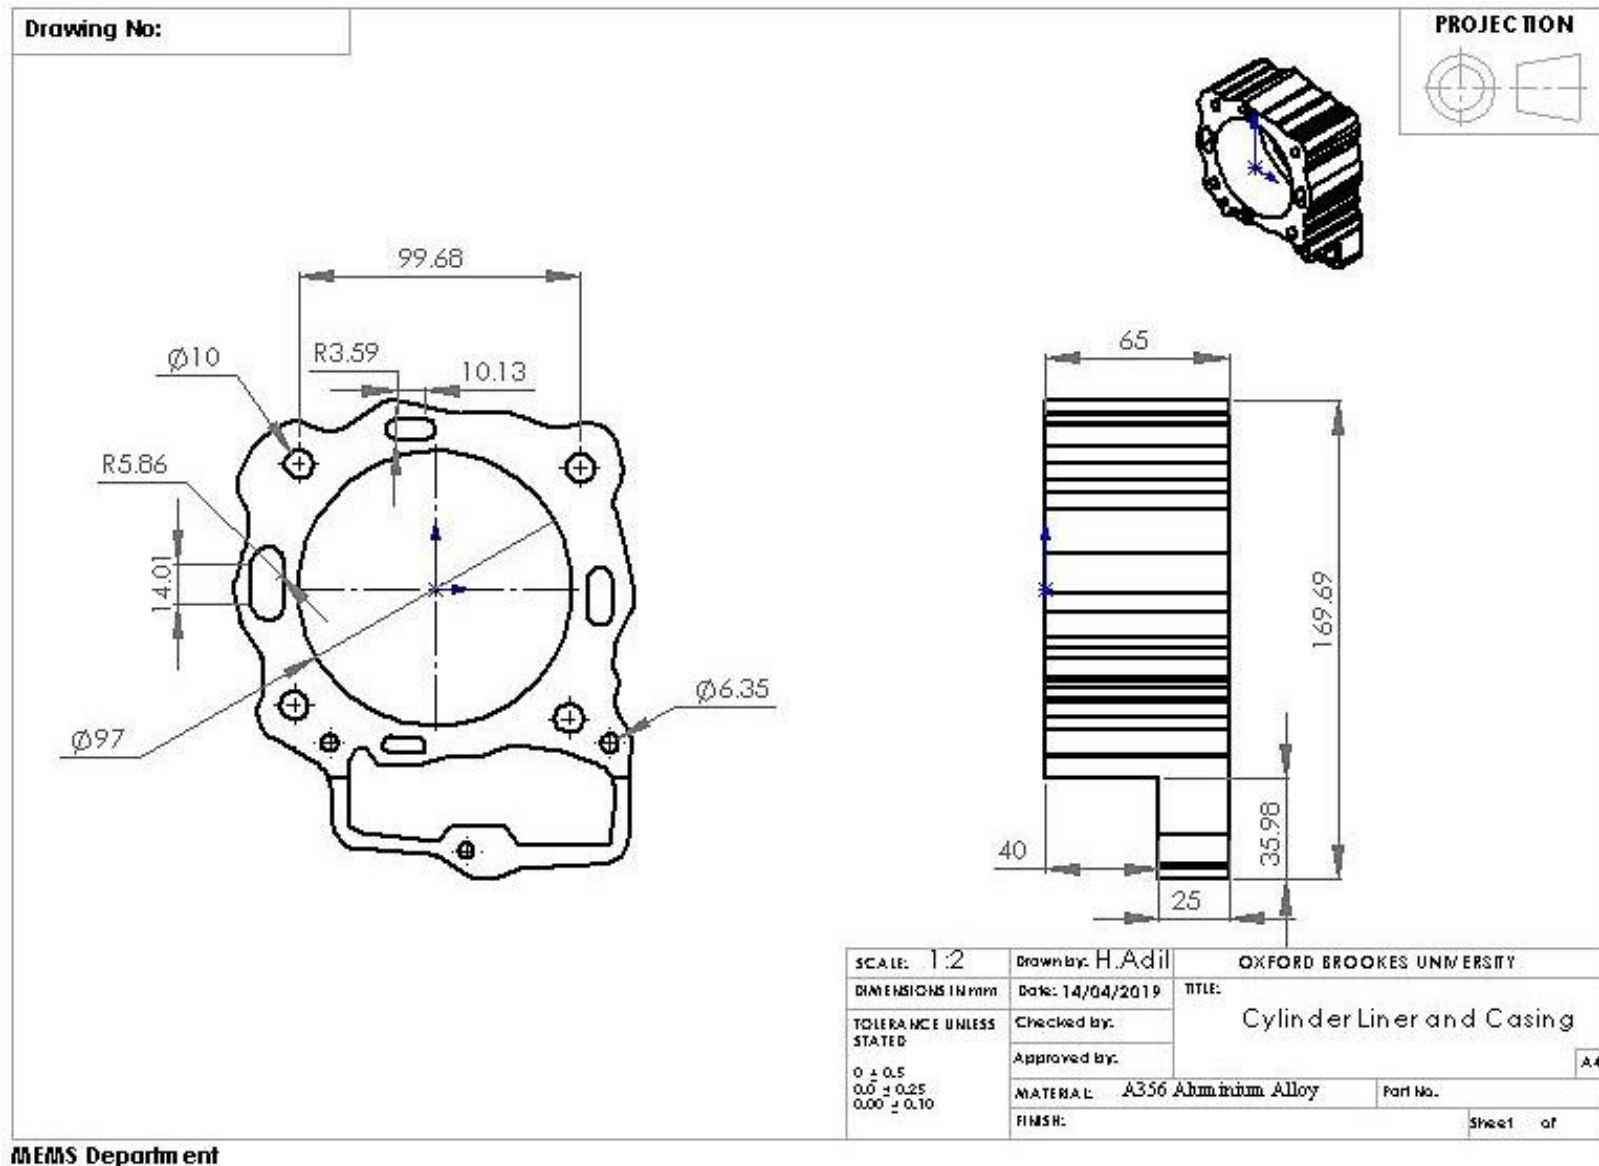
A 2D engineering drawing of the cylinder liner and casing for the piston FEA.
